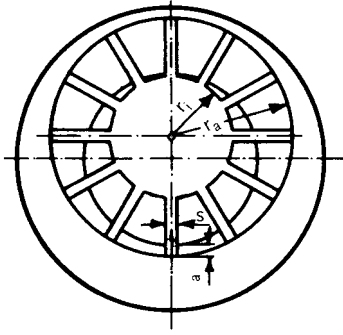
Impeller arrangement of a liquid ring vacuum pump
